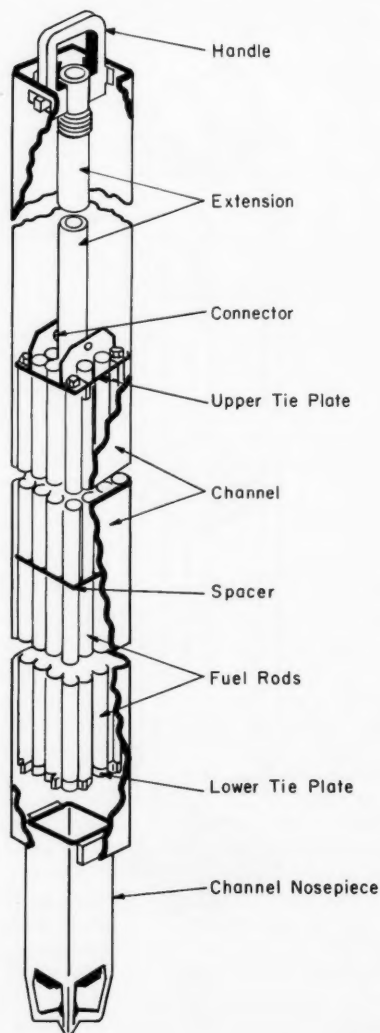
Cutaway view of fuel assembly in VBWR channel.¹²
